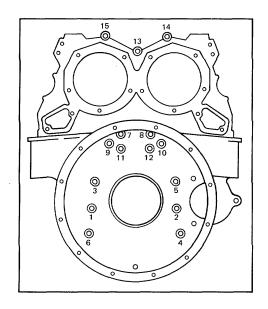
Flywheel Housing Bolt Tightening Sequence (Operation 2) - In-Line Engine
